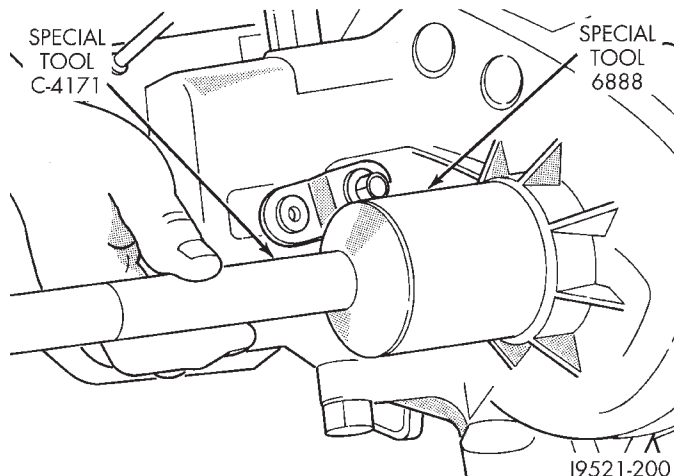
Seating Input Shaft BearingFig. 53 Front Output Bearing Installation
